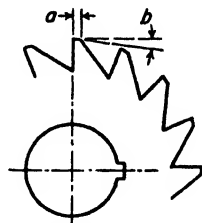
This figure shows the clearance (b) on the land (a) of a saw tooth of milling cutter.
